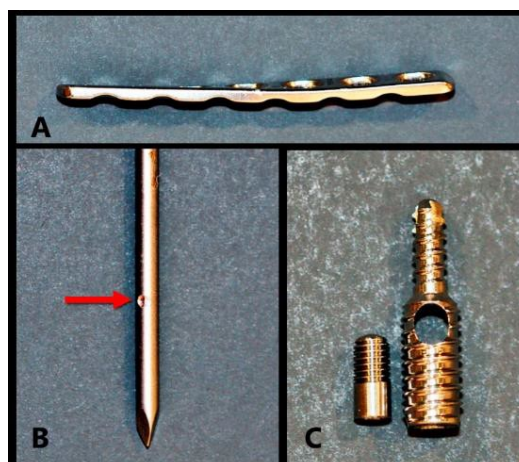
Implants retrieved after load to failure tests. A) A 2.4 mm LC-DCP® plate
